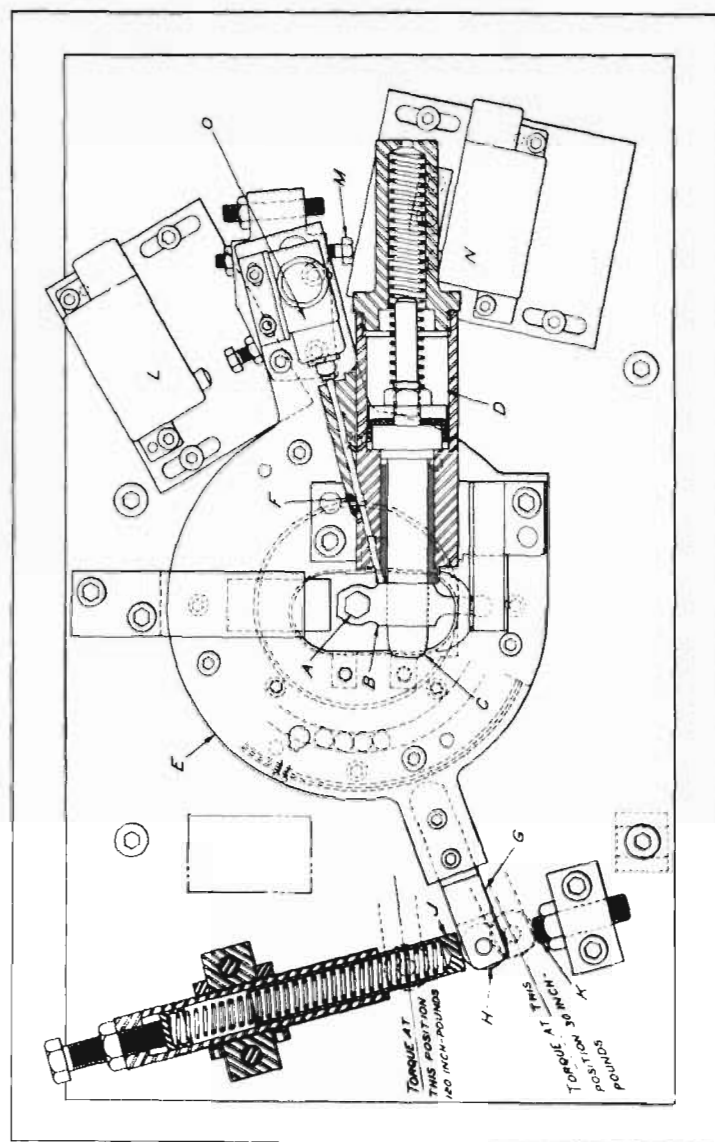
Assembly drawing of the torque inspection mechanism. The rocker arm *B* is applied over plunger *C* in a cylinder mounted on turntable *E*. Torque is measured, in effect, by the resistance of a spring in back of piston *J*.
